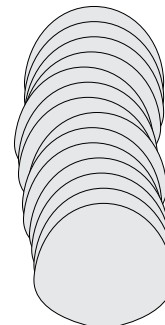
Too Much Weld-Puddle Overlap
